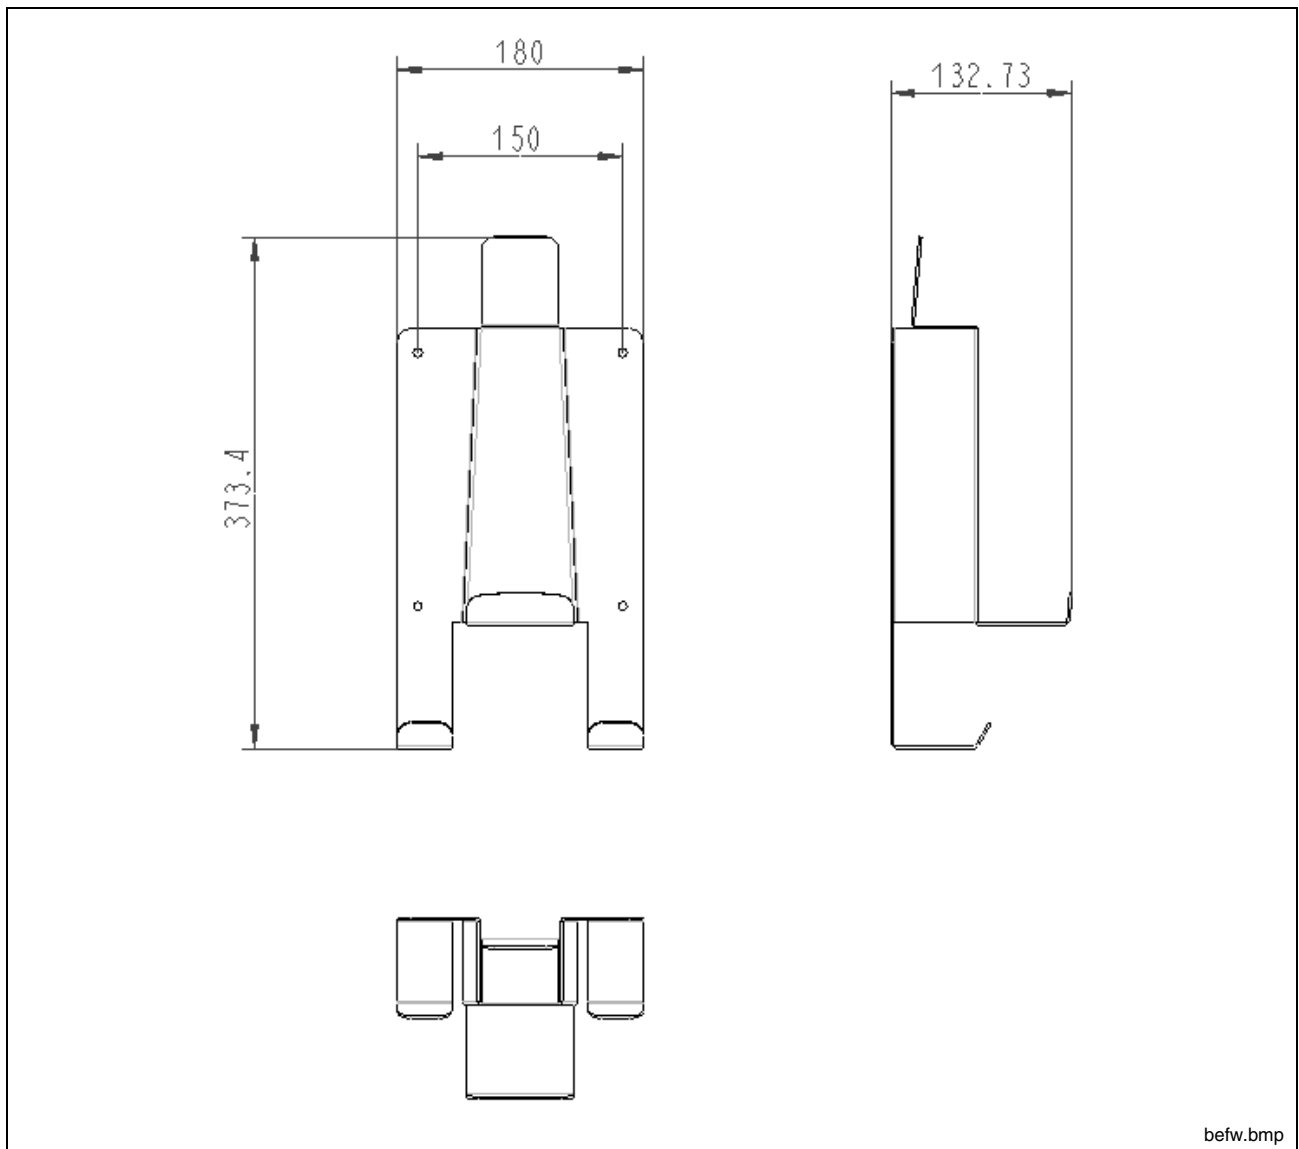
Housing and mounting dimensions: IndraControl VAC 30.1
